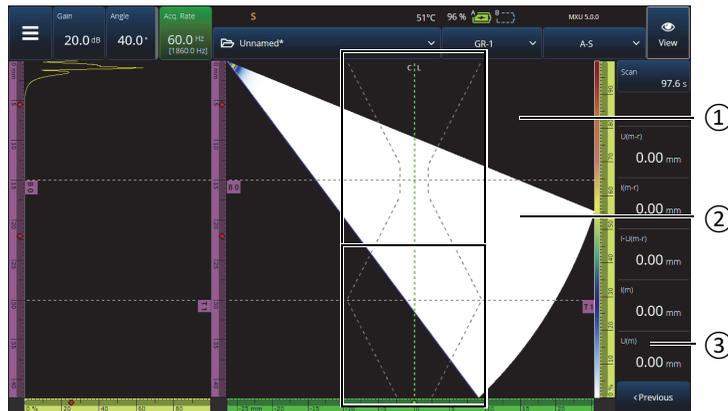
Example of a V-Offset weld geometry overlay
